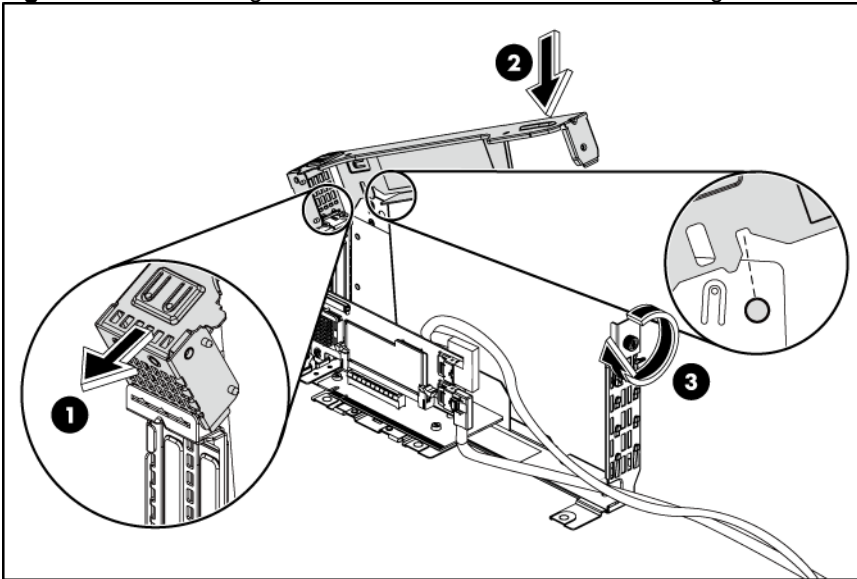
Installing the Smart Array P410 Controller Board to a 2U PCIe Cage
